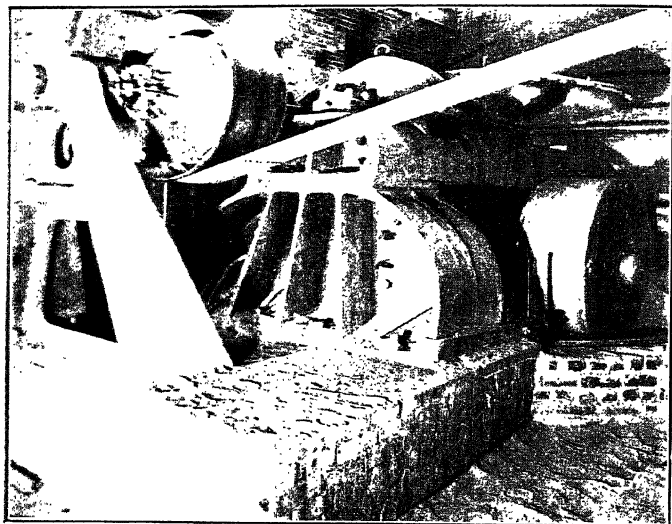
A dry pan for crushing flint clay. (Courtesy of Clearfield Machine Company.)
